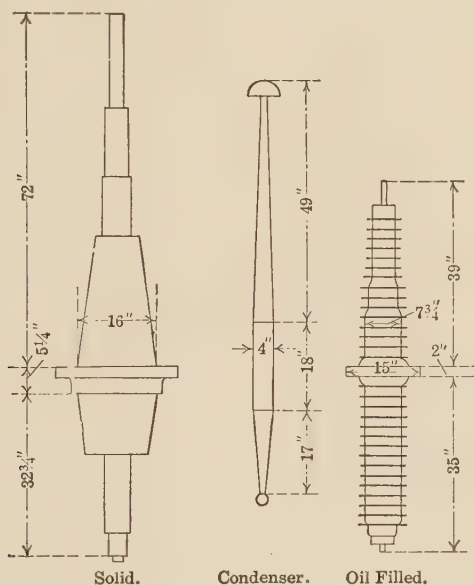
Bushings built to withstand 200,000 volts for one minute.
